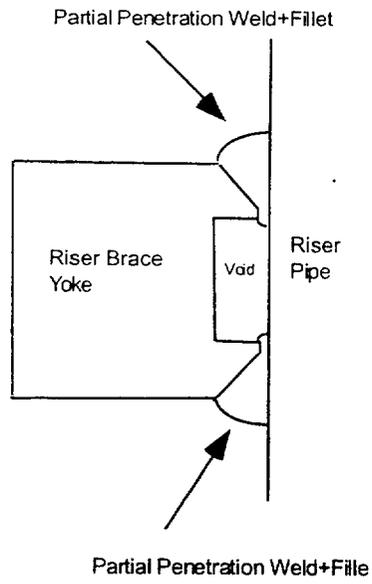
RS-8 and RS-9 Weld Geometry
